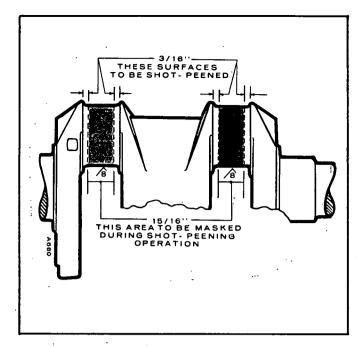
SHOT-PEENING THE CRANKSHAFT
